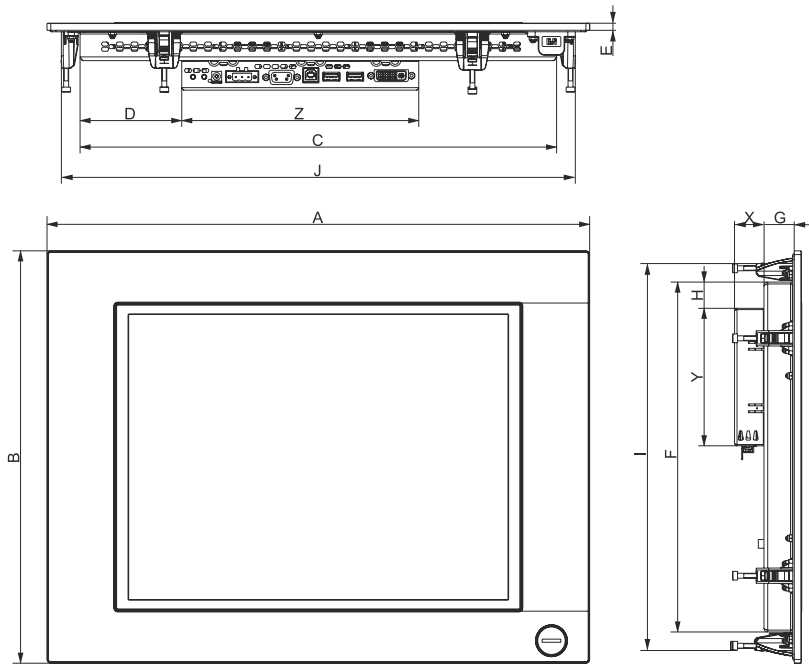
Automation Panel 1000 with clamping blocks - Dimensions
